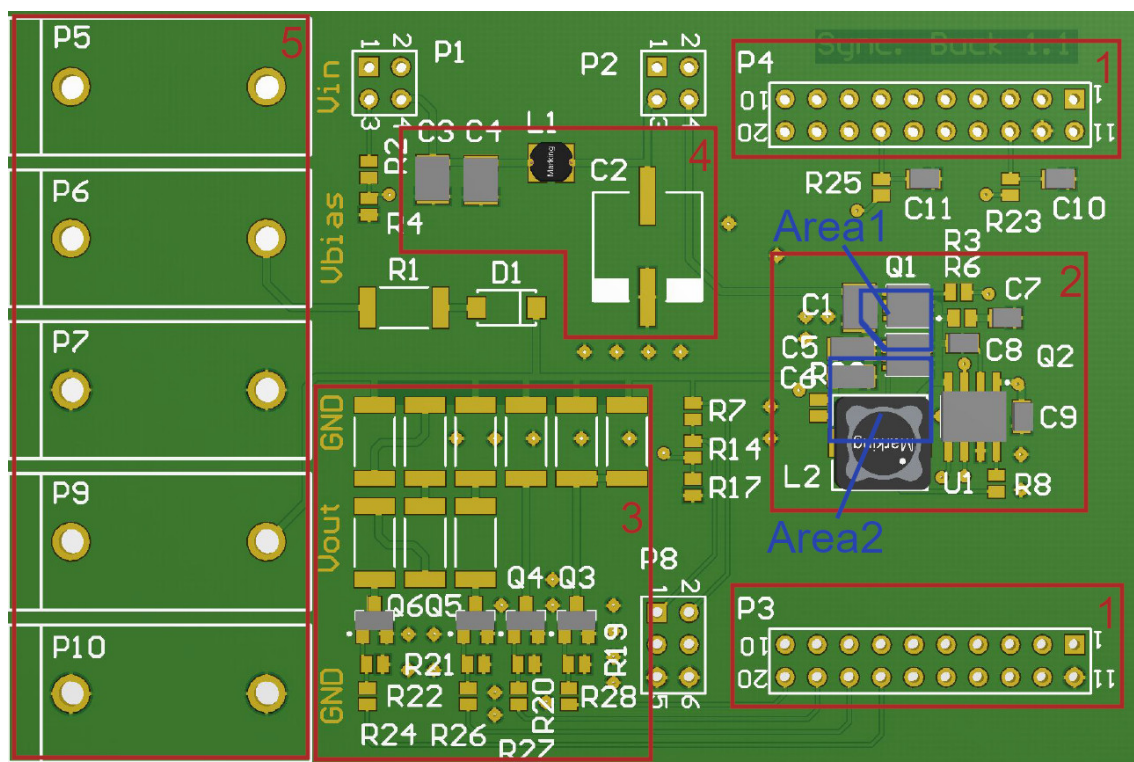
Prototype PCB layout (1: connectors to MCU; 2: buck converter with driver-IC; 3: switchable load; 4: input filter; 5: connectors for input-, output- and bias-voltage)
